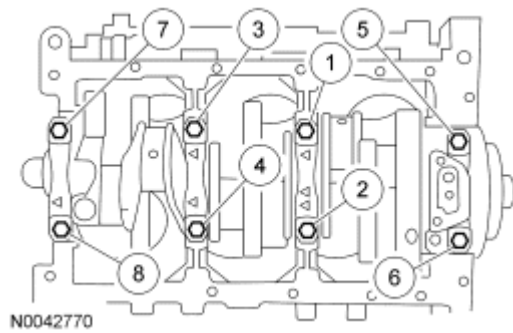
Identifying Tightening Sequence Of Crankshaft Bearing Caps Bolts
